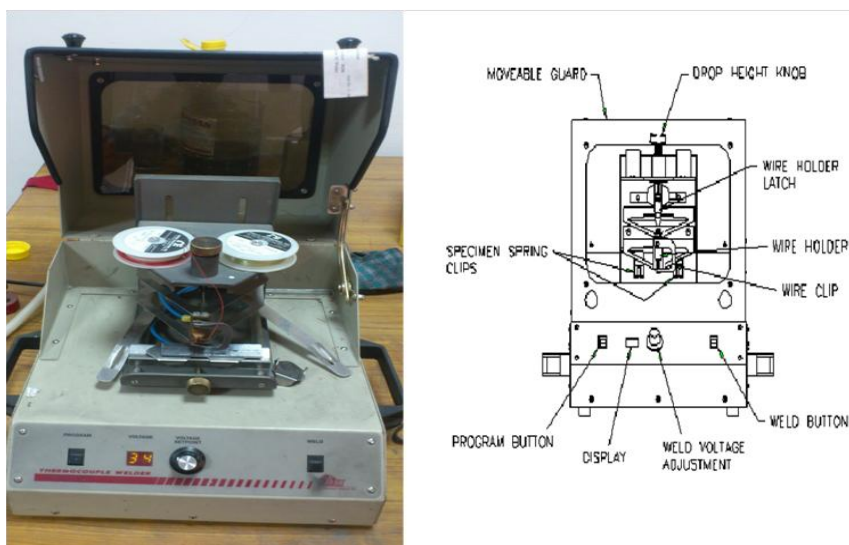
Thermocouple welding machine (35200 model).
